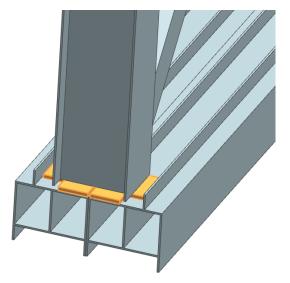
Vertical Profile-Bottom Beams 90° Connections - Brackets 1.1 and 1.2.1
